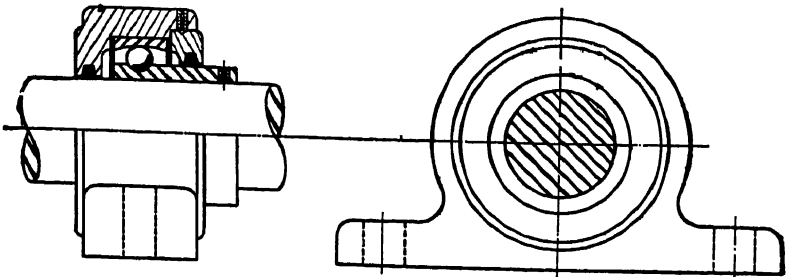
Adapter-type Single-row Ball Bearing and Pillow Block.
